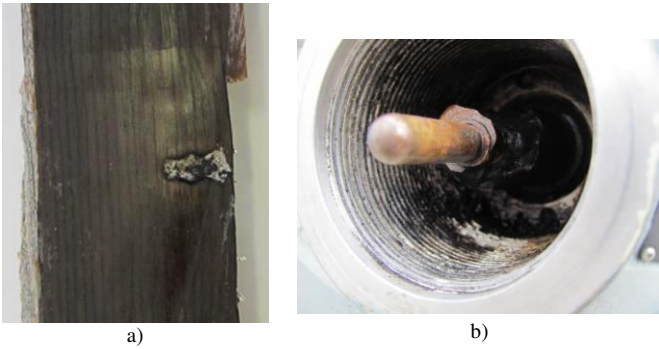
Examples of bushing damages: a) internal breakdown over 7 layers; b) ungrounding test tape - breakdown insulation.
